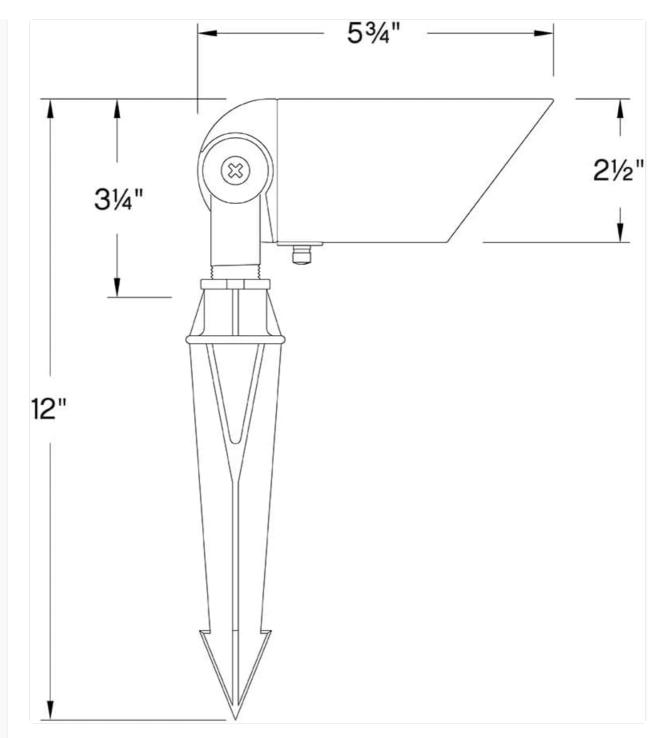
Technical drawing showing the dimensions of the Hinkley 1536SK-LL Spot Light.
